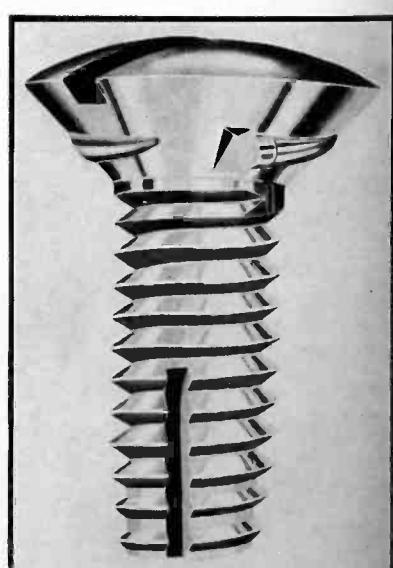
The spurs of this locking thread-cutting screw force metal into the cavities to prevent any motion
